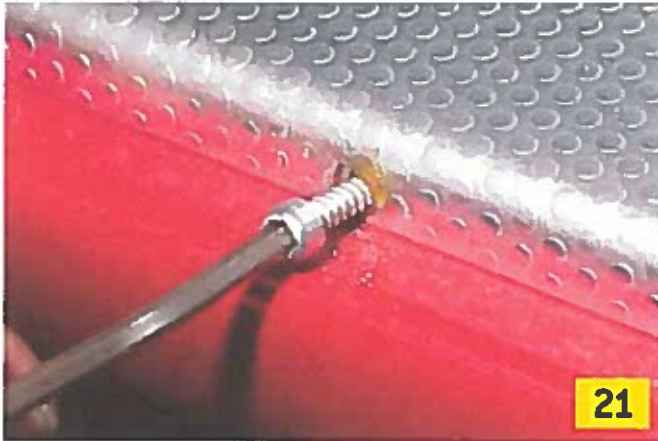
#4 cap head sheet metal screws are hardened and work well for pre-tapping holes for the truss head trim screws. Use grease to lubricate the threads and be careful not to use excessive force which could break the tapping screw.
